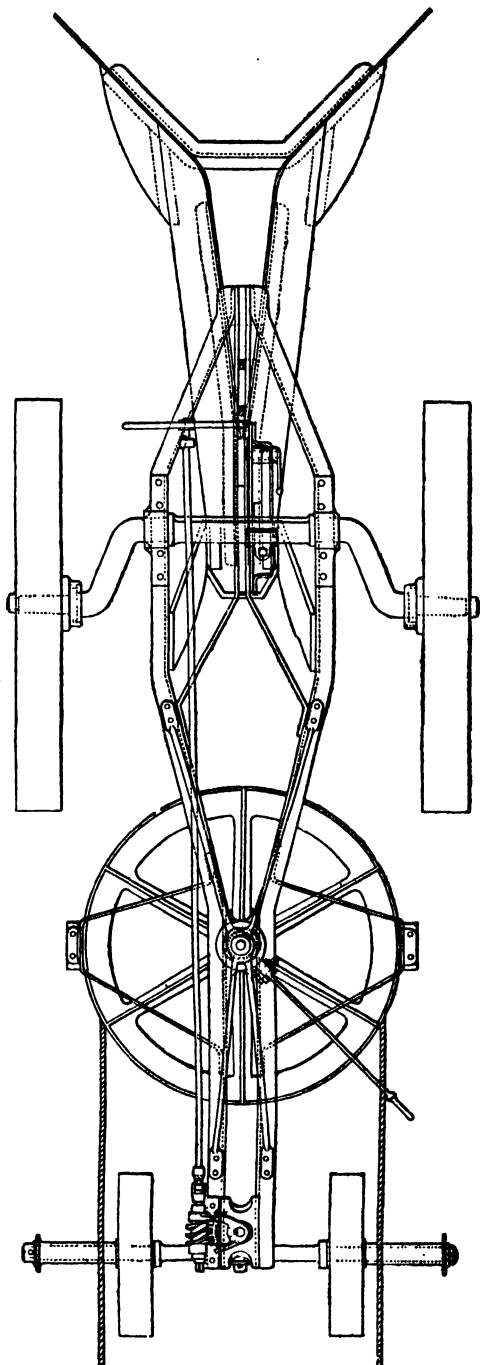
is Knight's steam-power digging machine, specially intended for hop-gardening. The machine is driven by a rope running over the three pulleys, A, B, placed on the top of the implement. The implement is impelled forward and the forks are driven, when required to work, simultaneously. The pulley A is the main driving part, the pulleys B being merely employed to give the rope a sufficient grip. The power is further communicated by the wheel D to the main axle, a notched pulley E and a pitch-chain. There are three forks hung on as many loops of the crank, the loops being at different angles, as shown by the positions of the forks ccc . The upper part of each fork-staff describes a circle with the revolution of the crank, but as the fork-staff is held by an arm one-fourth of its whole length from the bottom, the figure described by the point of the fork is not a corresponding circle, but an oval. By throwing the carrier of the arms forward at the top, the bottom is thrown back, when an oblique instead of a perpendicular thrust is given to the forks. With the forks held in the position of the dotted lines the depth they would enter the soil would of course be less, while the angle at which the spits of soil would be picked would also proportionately differ. The forks may be lifted entirely free from the surface, and for this there is a handle.
